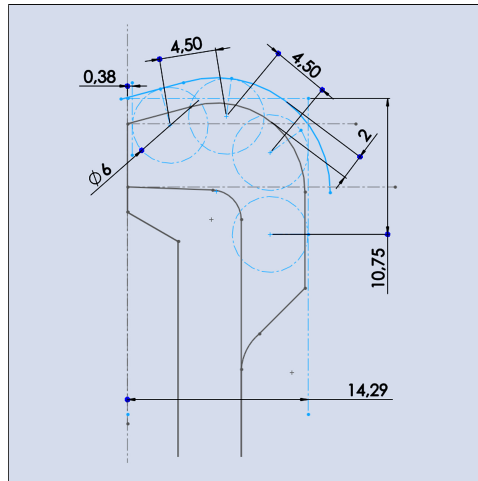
Cutter profile of the custom bit. Dimensions in mm.
